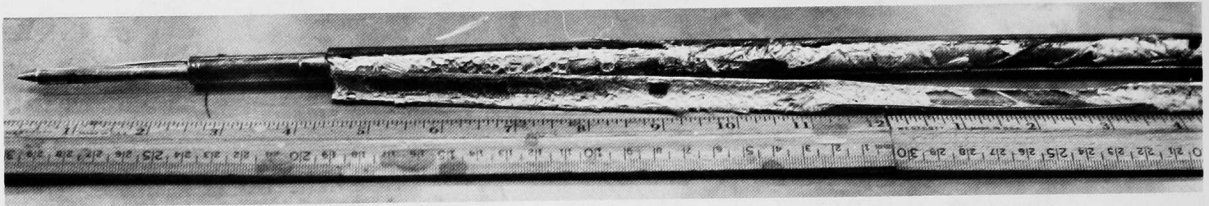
Exposed Portion of Lower Section of Inner Wall after Longitudinally Slitting Outer Wall. ANL Neg. No. 900-1156.
